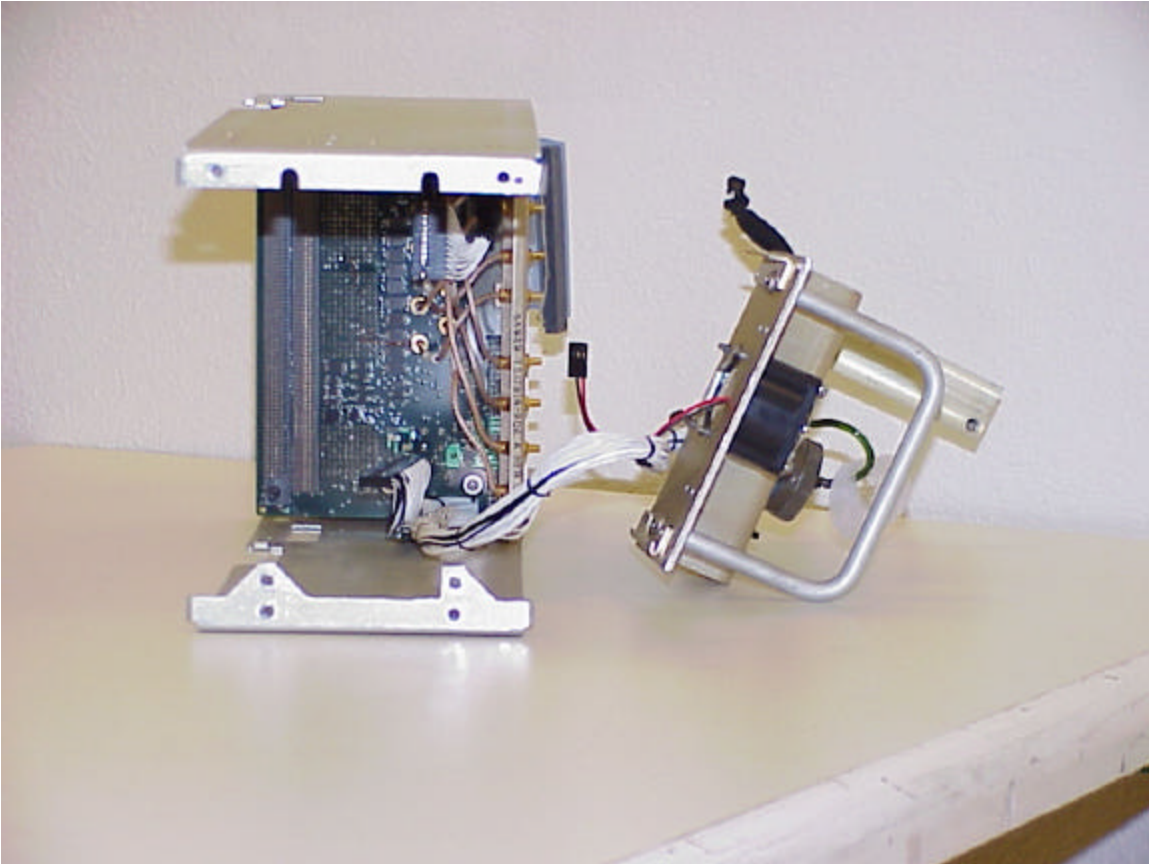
View of Unit Side, A4 Power Supply/Modulator Assembly Removed, Showing A1 Interconnect Assembly
